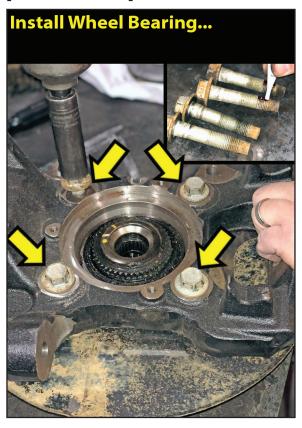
Apply thread locker to the (4) factory wheel bearing assembly bolts. Place the new knuckle
